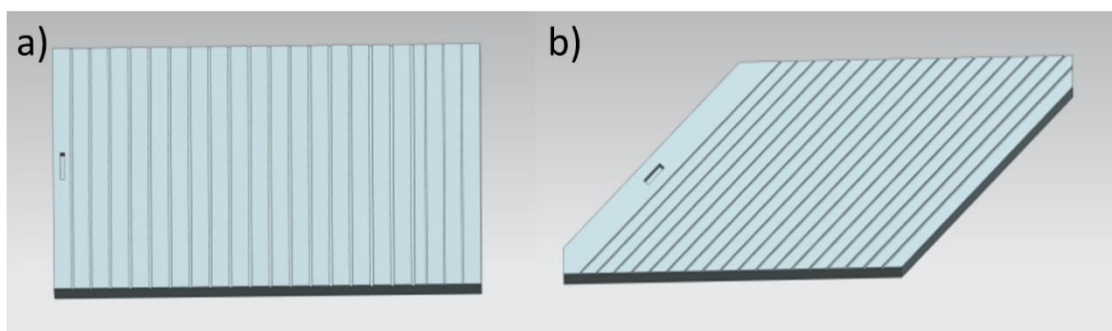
CAD files of 3D printed wafers made with surface a) straight and b) diagonal, 45° grooves.
